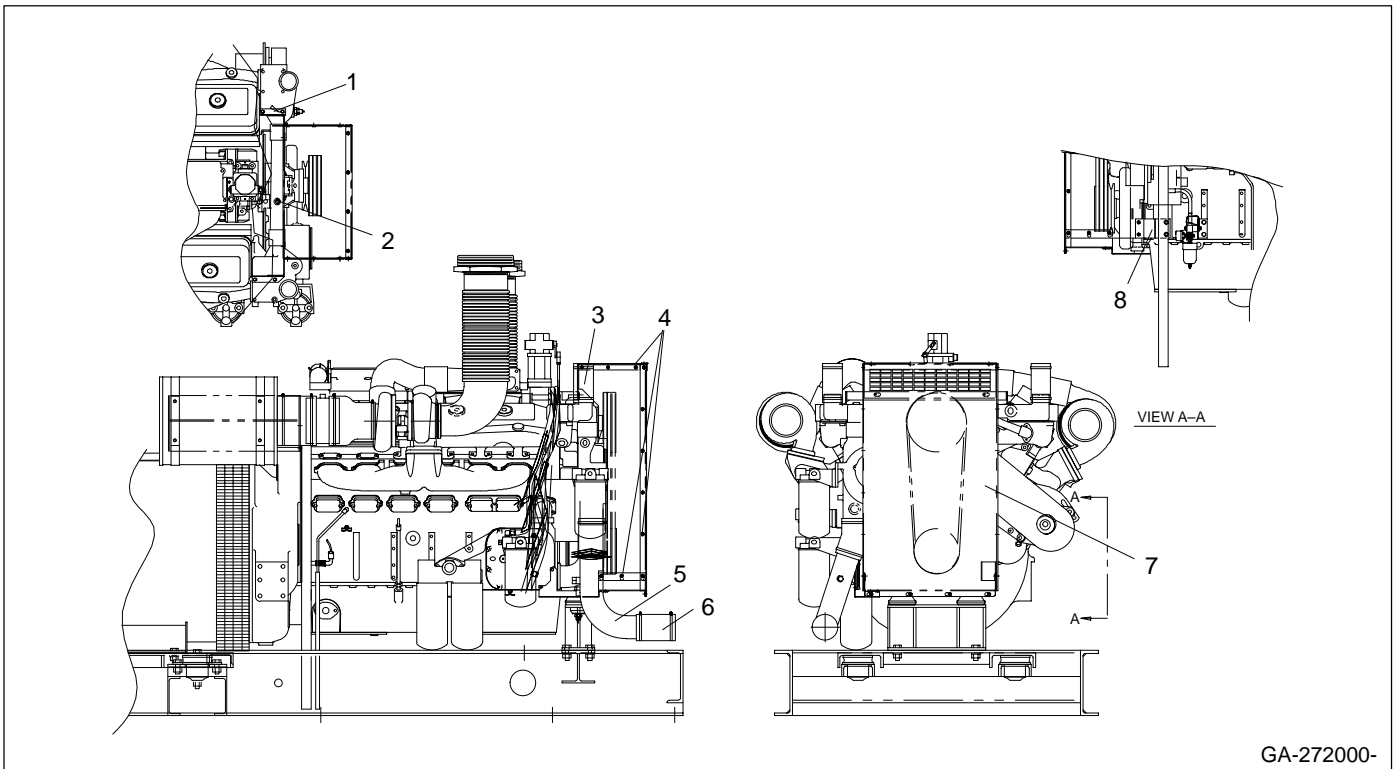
230-300ROZD Remote Radiator Setup Kit
